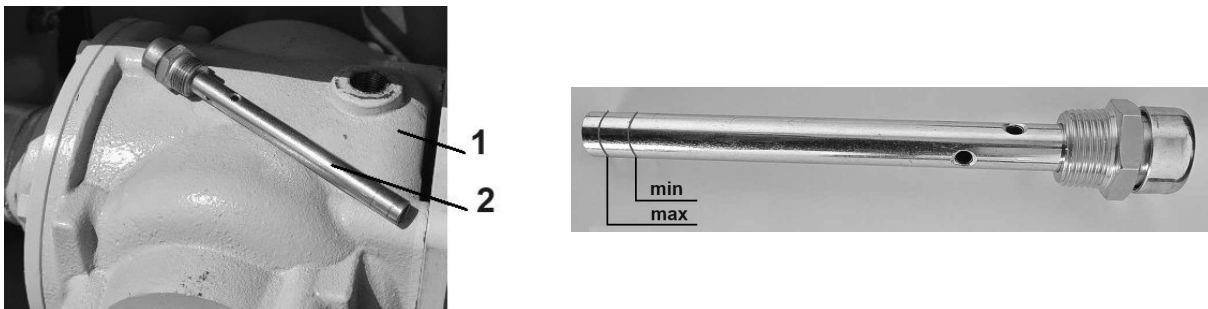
Oil level in the bevel gearbox: 1 – bevel gearbox, 2 – dipstick plug
